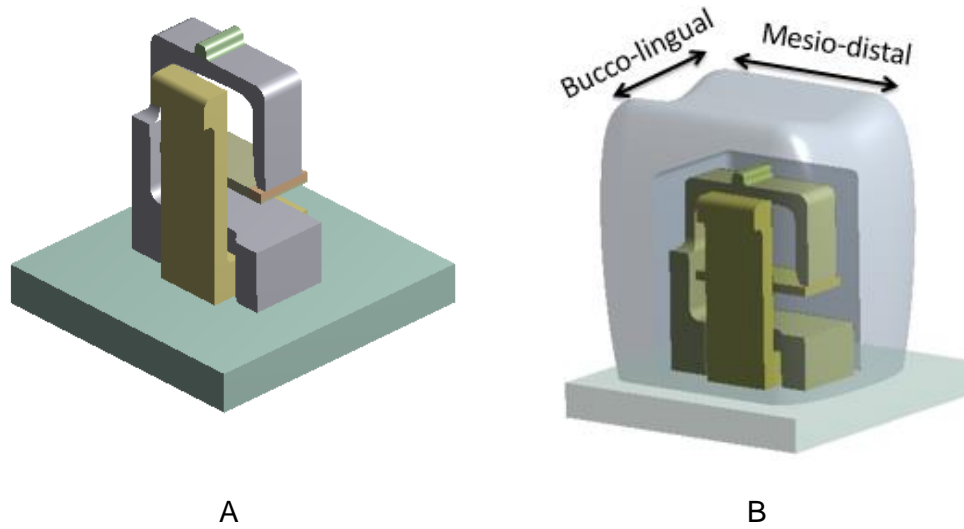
Tooth embedded sensing mechanism. A, Assembly of vertical and horizontal force sensing structures. B, Full assembly of the sensing mechanism integrated inside the molar tooth
